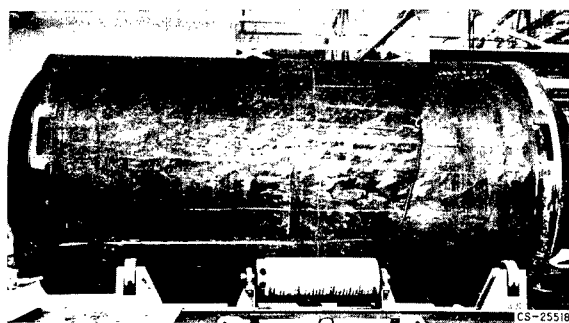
Brittle fracture of large rocket motor case.
